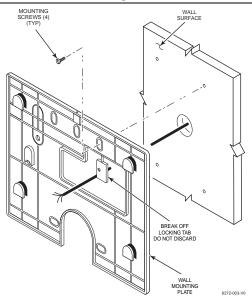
Mounting the TouchCenter Mounting Plate Wiring the TouchCenter
